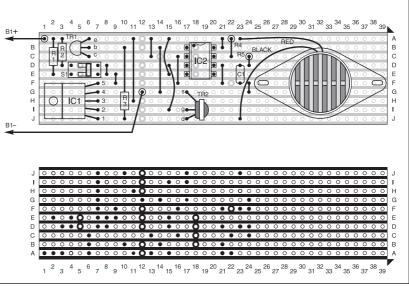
Fridge/Freezer Alarm stripboard component layout and details of breaks required in the underside copper tracks.
